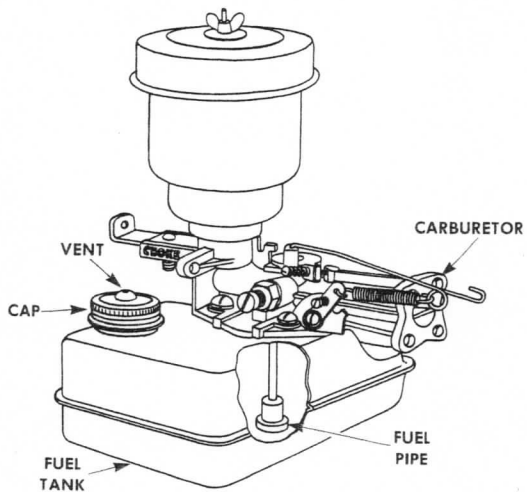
The carburetor is mounted to the fuel tank. (Briggs & Stratton Corp.)
